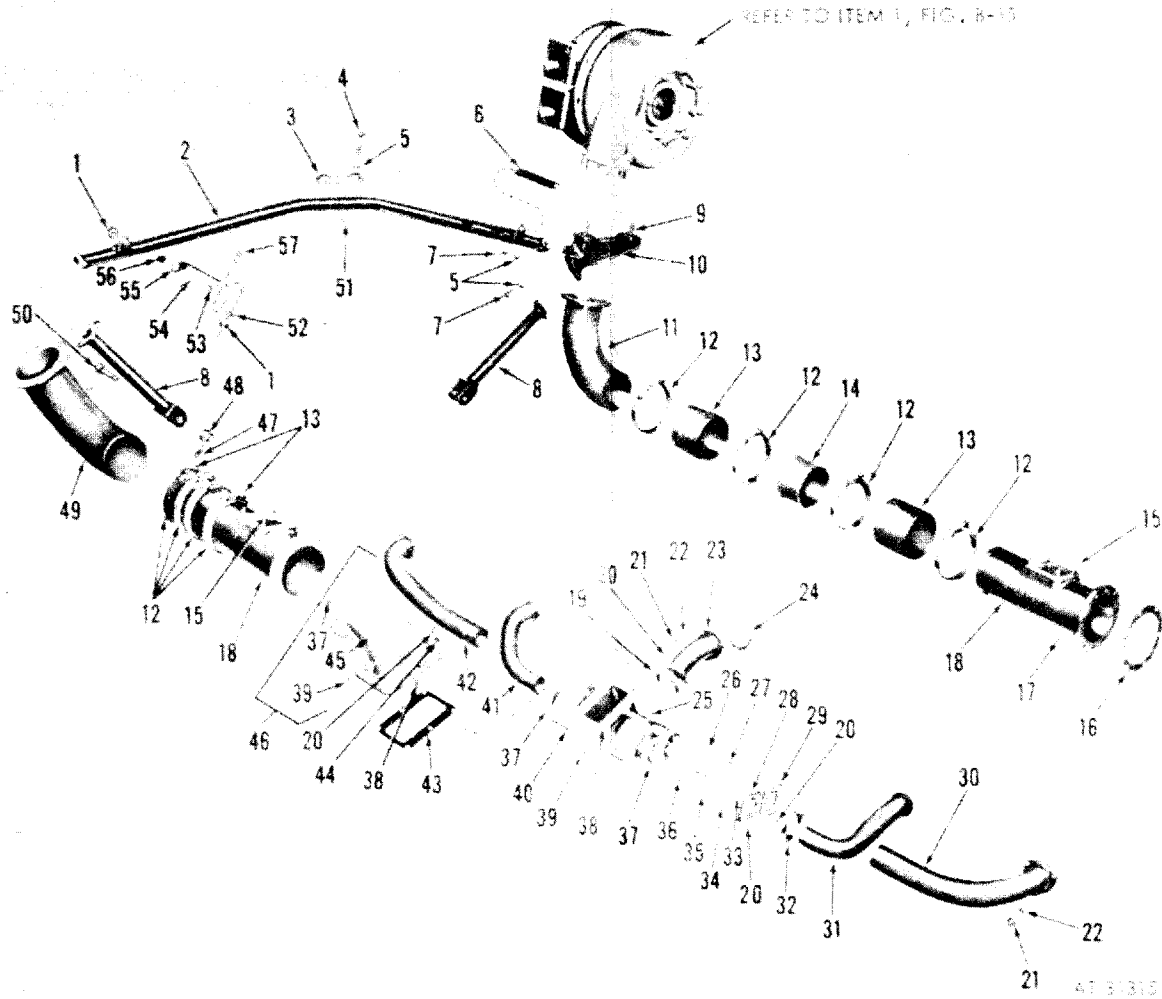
Intake Manifold, Tubes, Turbosupercharger Tie Rod and Support and Associated Parts—Exploded View.
